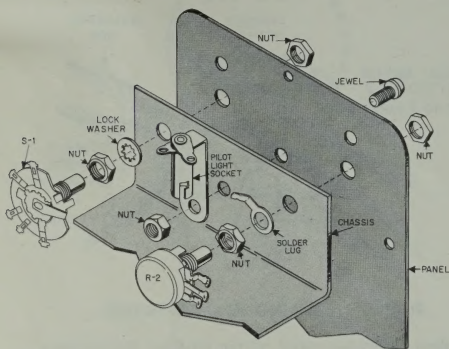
FASTENING THE CHASSIS TO THE PANEL
